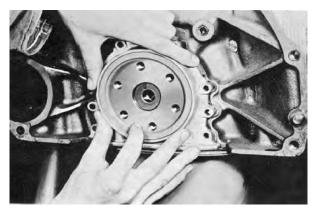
Fitting the rear sealing flange (6-cyl. engine)
